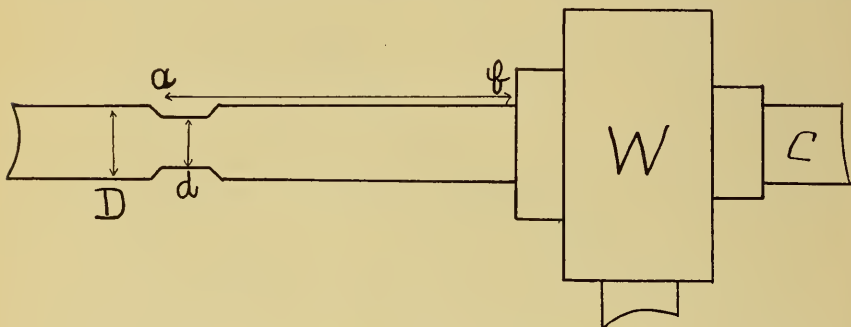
ALTERNATE BENDING TEST SPECIMEN
